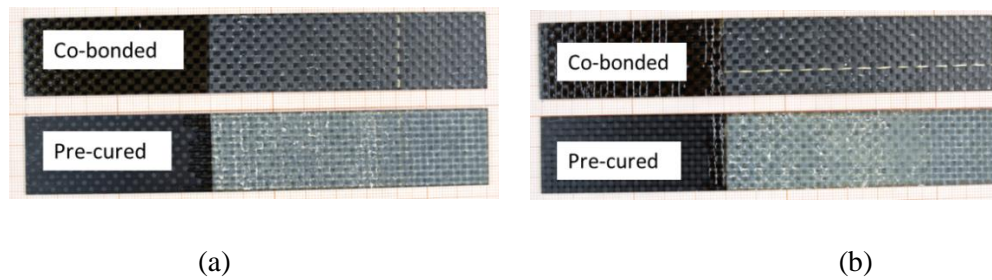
Fracture surfaces of bonded joints of adhesive film F2 with different pre-bond moisture content (a) 0.33%; and (b) 1.25%, tested at 120°C.
